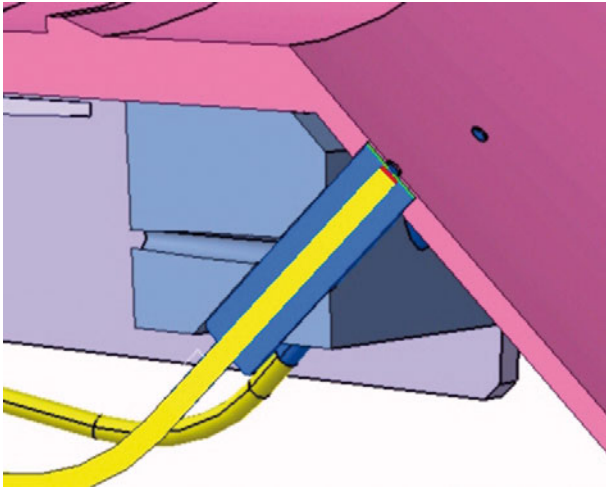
Design drawing of the detector front end at the end of the UCN guide showing the holder, indicating the stainless-steel capsule with the spot-welded foil (green) containing the scintillator (red) and the light guide (yellow).
